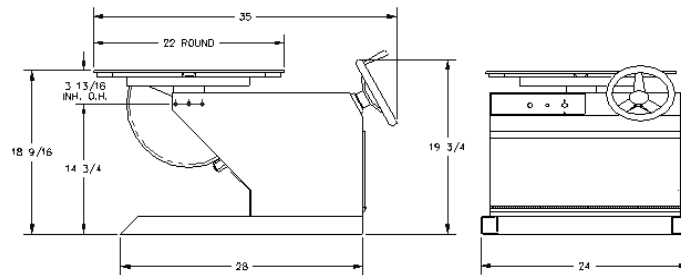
Dimensions of rotating, tilting weld positioner suitable for small subassemblies (drawing courtesy of Preston Easton Co.)
